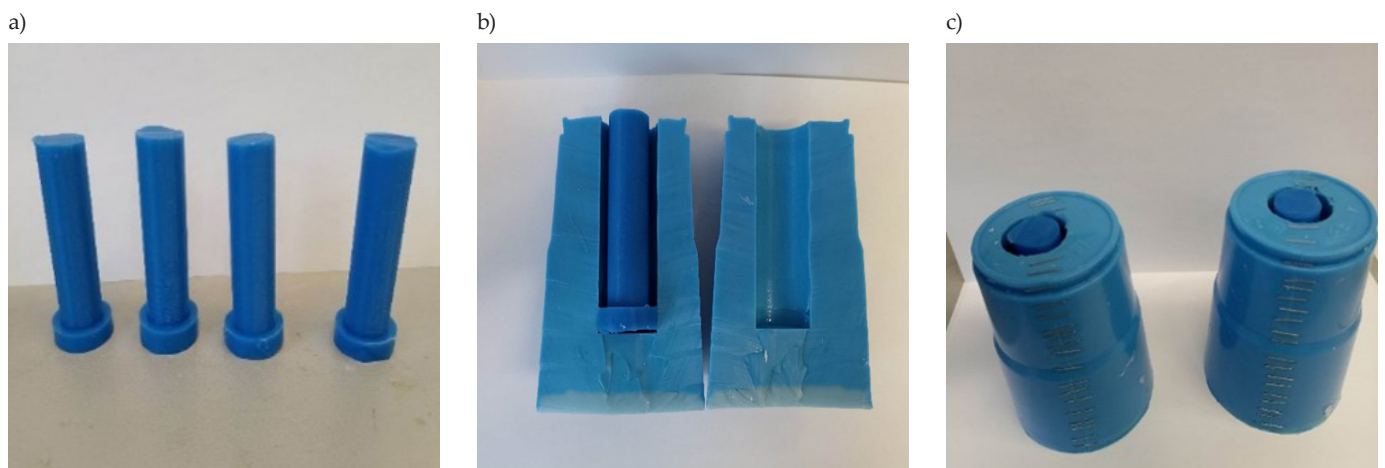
Preparation of silicone molds and molding core: a) internal mold element, b) external and internal mold elements, c) finished mold
